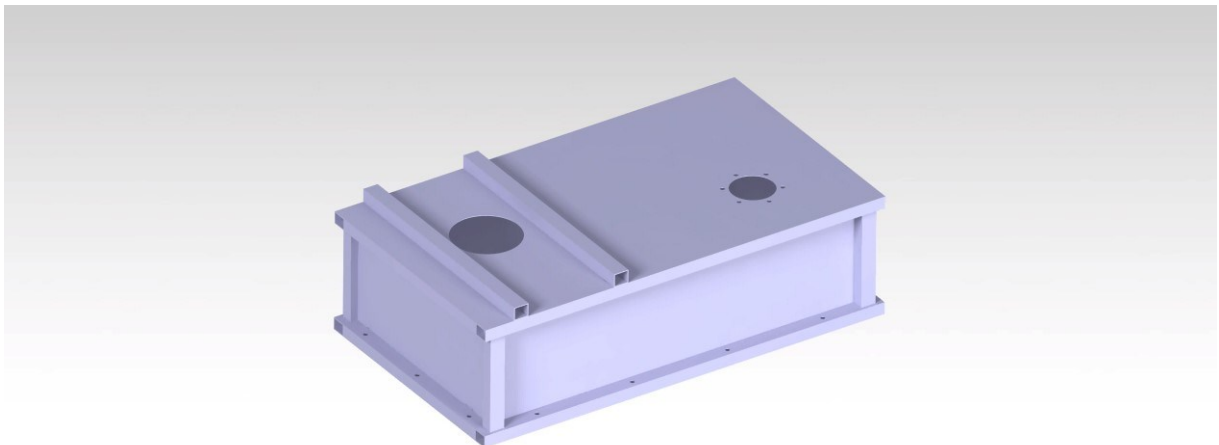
Upper part of the collecting bin box. The left opening is for the impeller's casing fitting and the right opening for the hose diffuser mounting.
